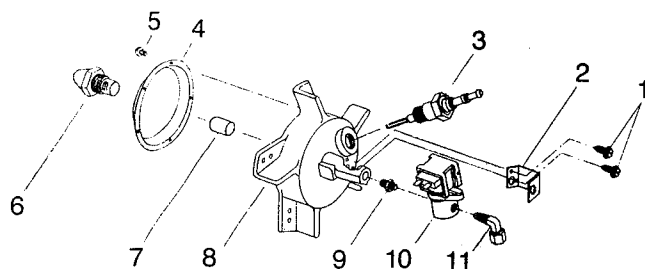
Replacement Parts Illustration for Motor and Pump Assembly
